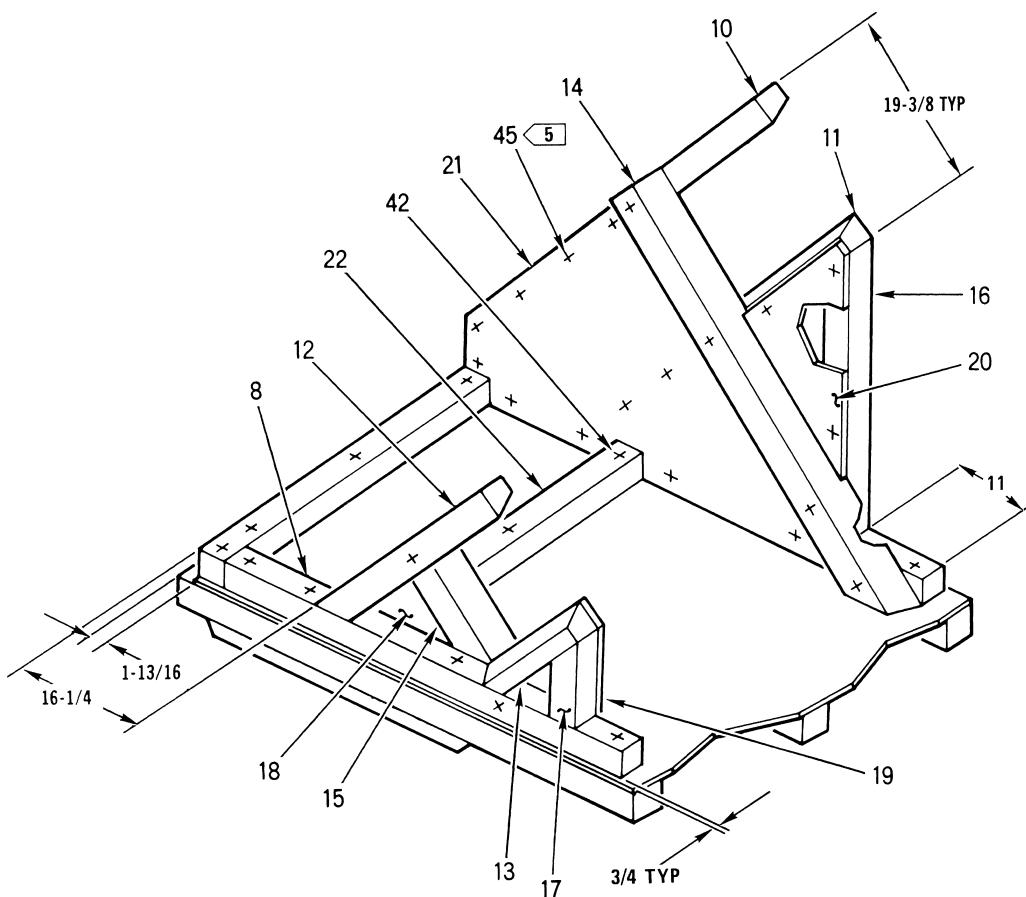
Horizontal Stabilizer Single Shipping Container (Sheet 1 of 11)
